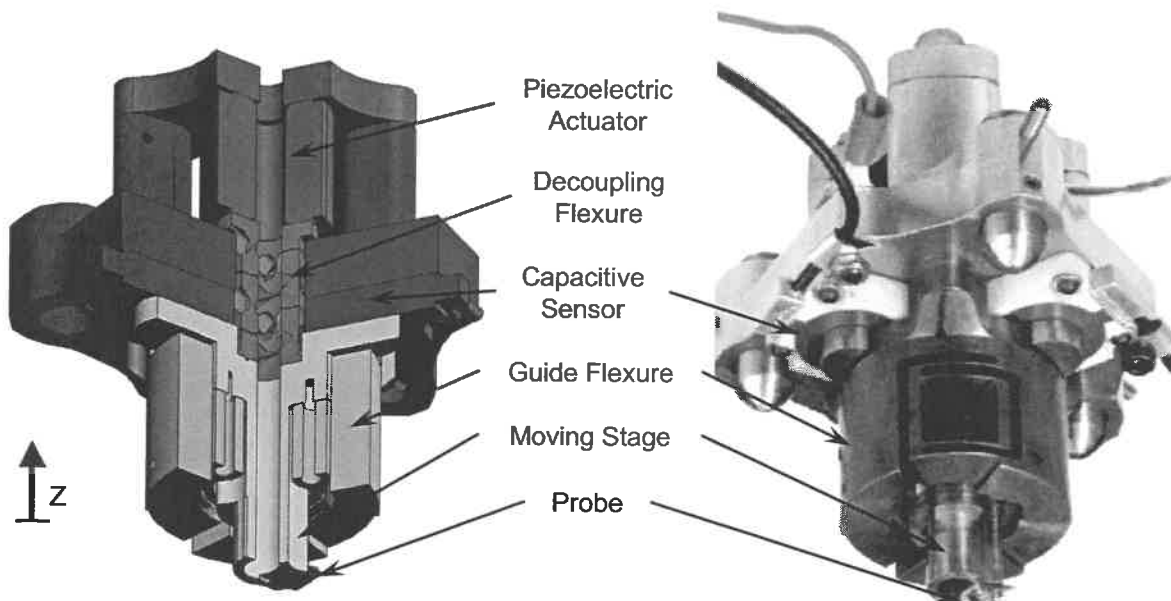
CAD cross-sectional view (left) and photo (right) of assembled HAFM head.
